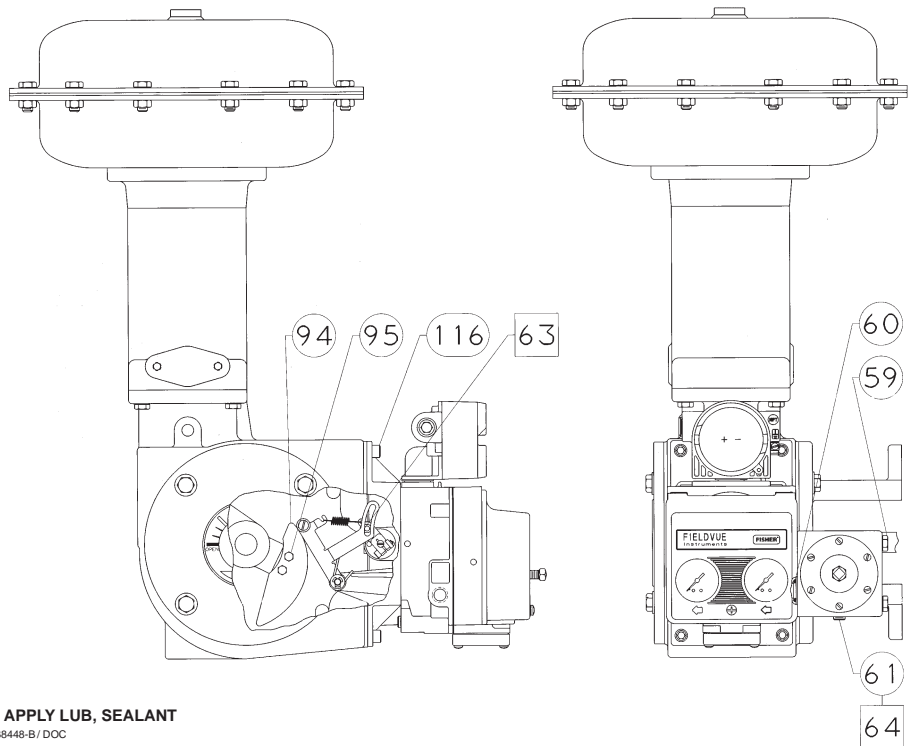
Type DVC5020 Digital Valve Controller with Integrally Mounted Filter Regulator Mounted on Type 1051 Size 40 Actuator
